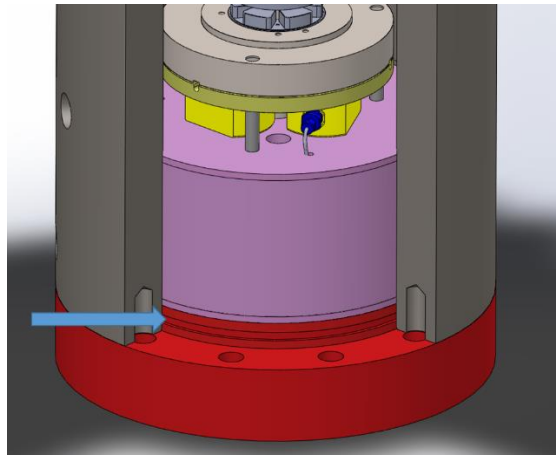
Bottom plug static leakage path. Arrow indicates O-ring placement
